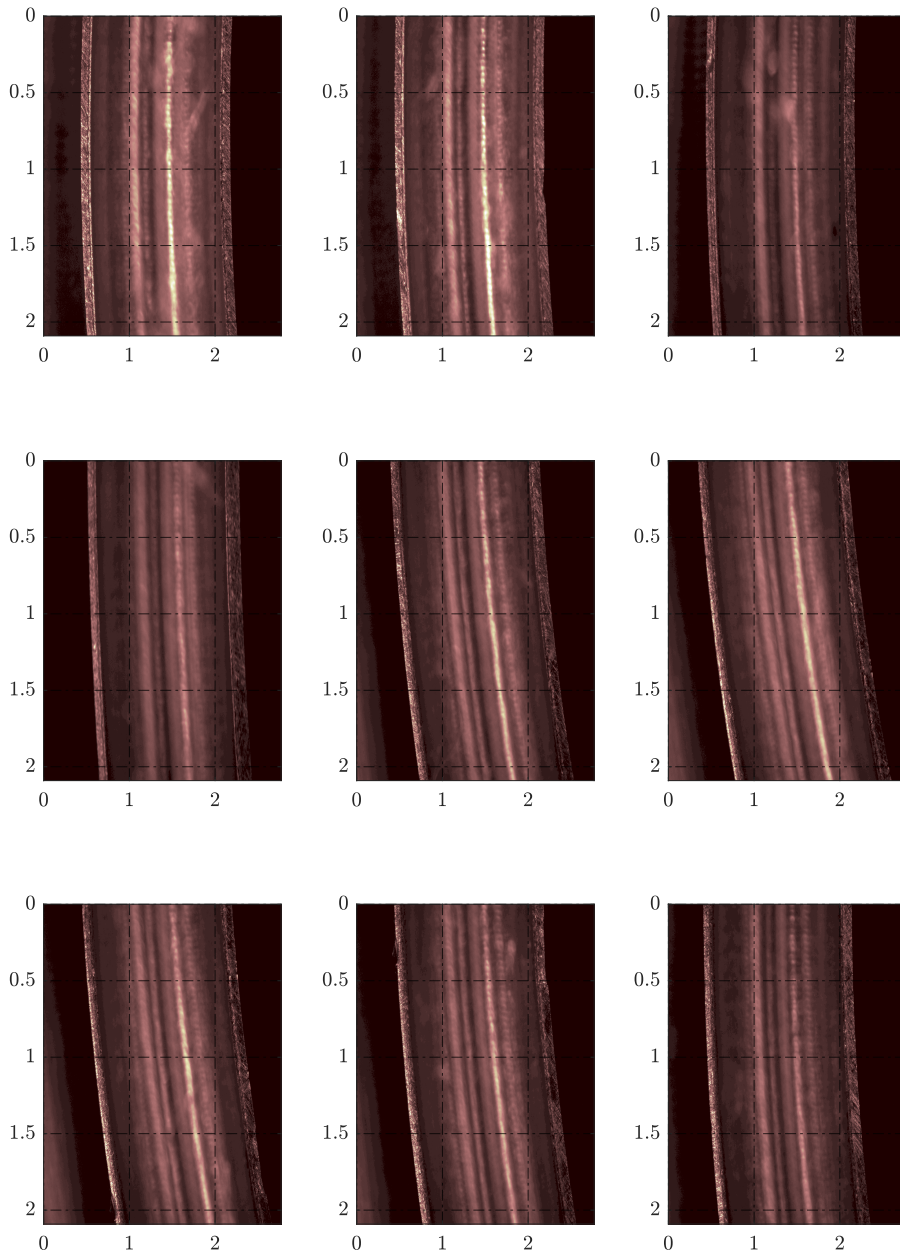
Valve plunger contact surface scans of concept 2, inner ring part 1.
